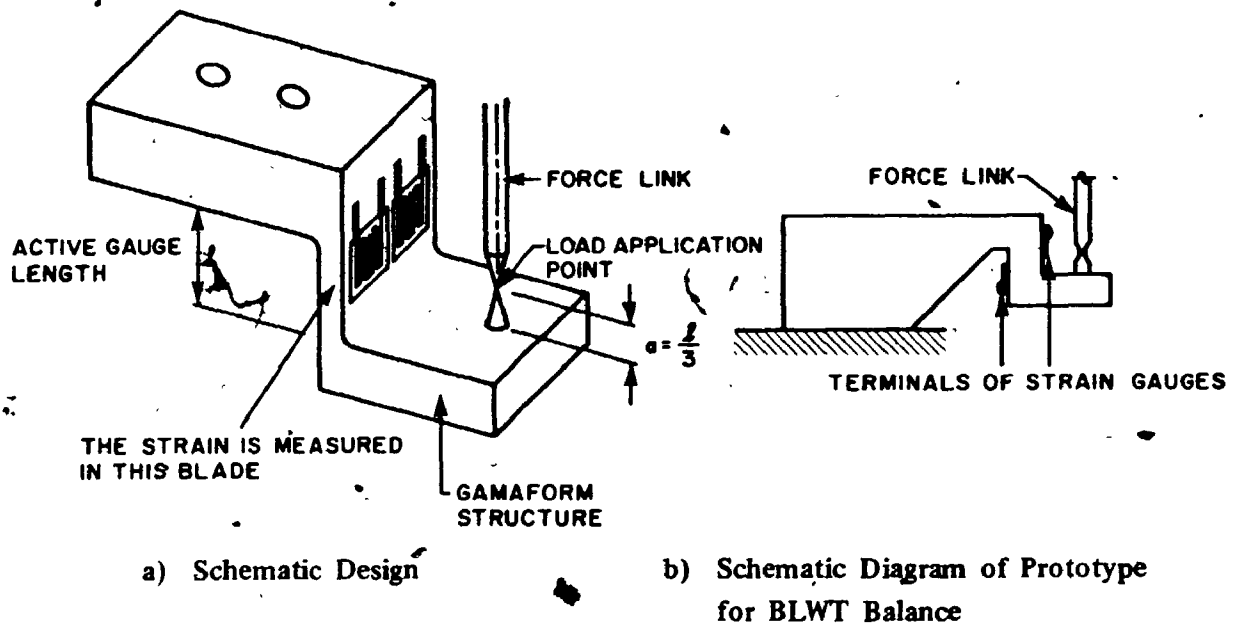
GAMMA-SHAPED BENDING LOAD CELL
